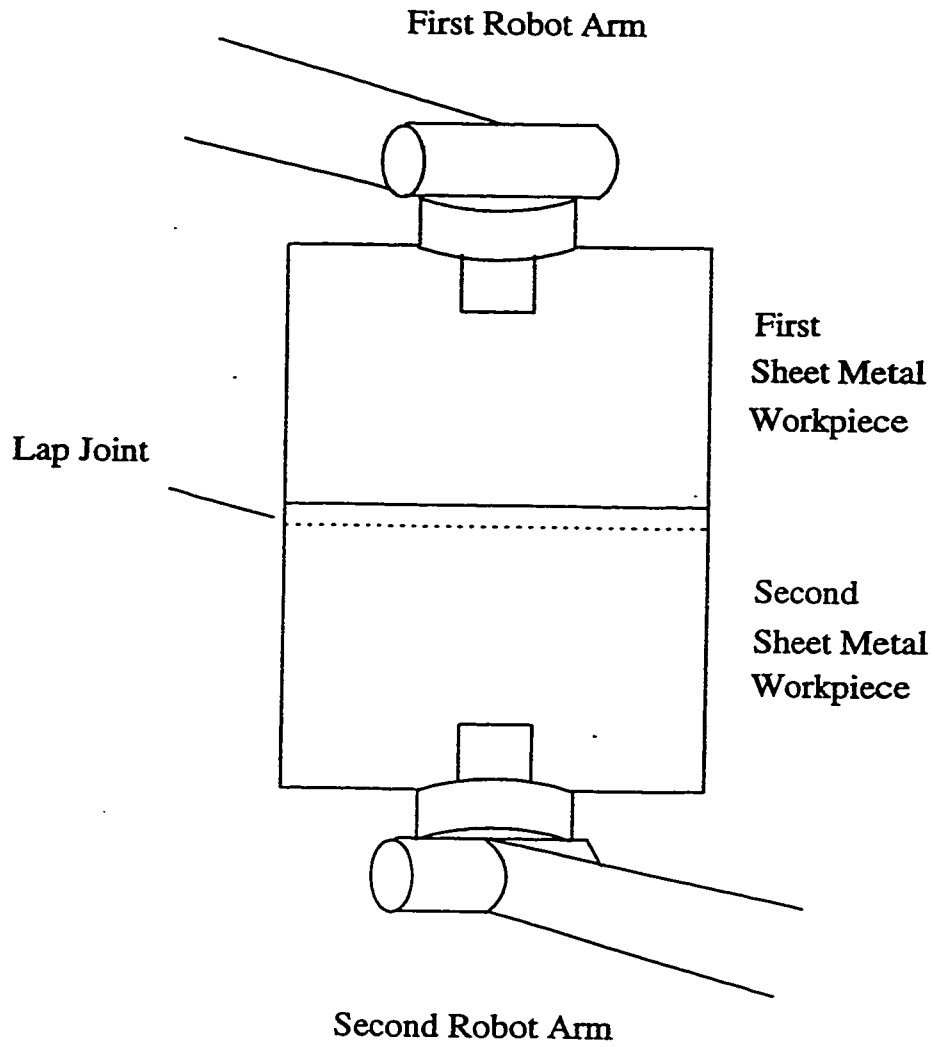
Robotic Fixtureless Assembly of Sheet Metal Parts
